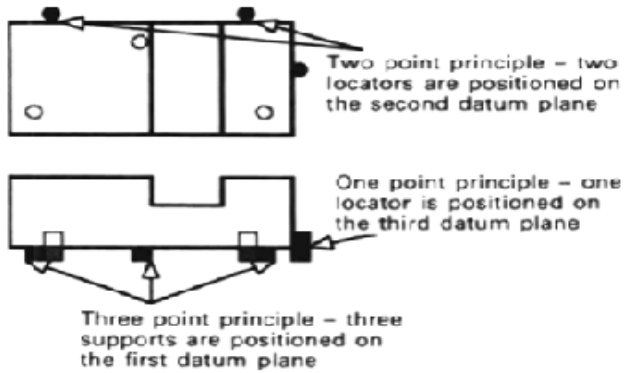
The 3-2-1 Supporting and locating principle for a prismatic workpiece.
